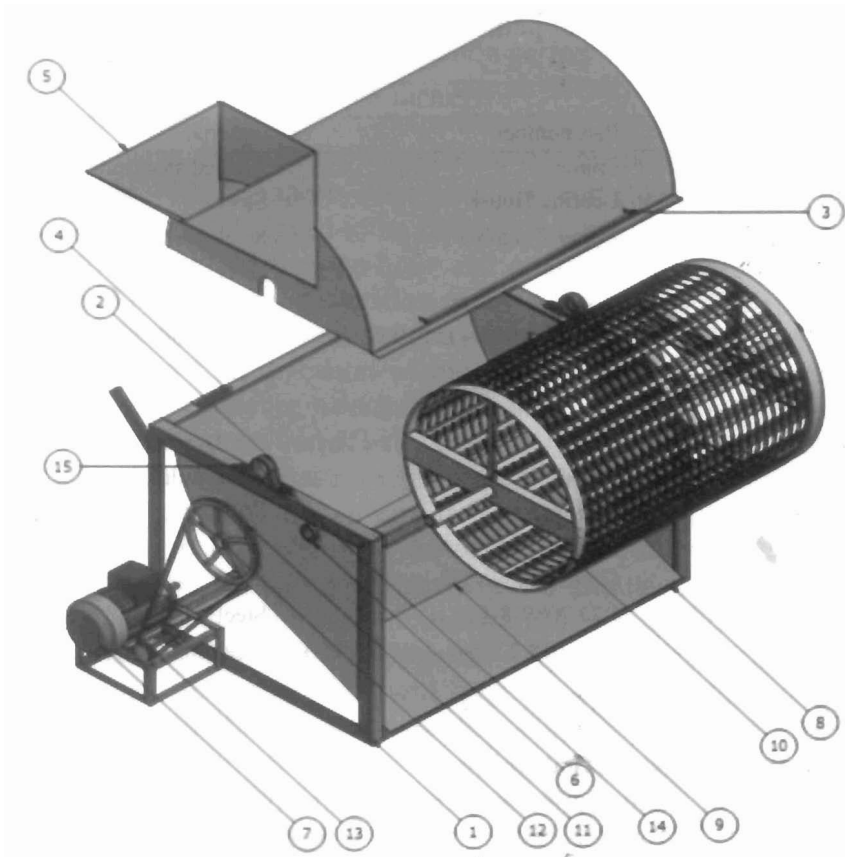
Exploded view of palm fruit stripper for quartered- bunches
